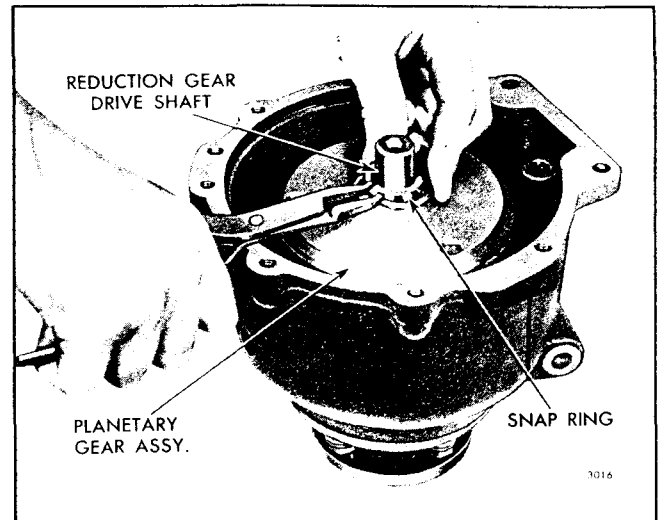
Removing or Installing Planetary Gear Snap Ring from/on Reduction Gear Drive Shaft (1.5:1 Ratio)
